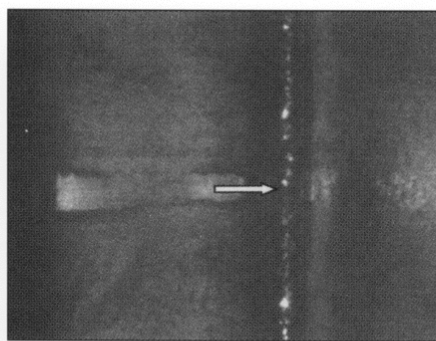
Specimen with a complete joint formed after brazing of a piece of sinusoidal fin over the gap between foils. Part of the fin was cut off to reveal the joint.
